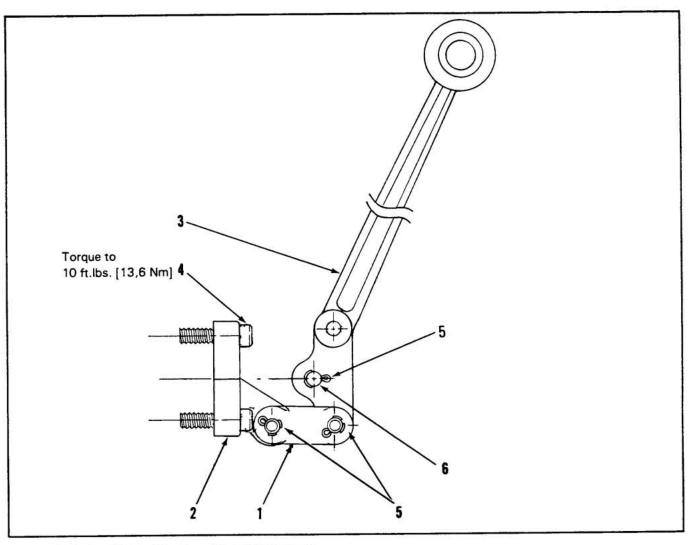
Optional Vertical Handle and Bracket Assembly.
